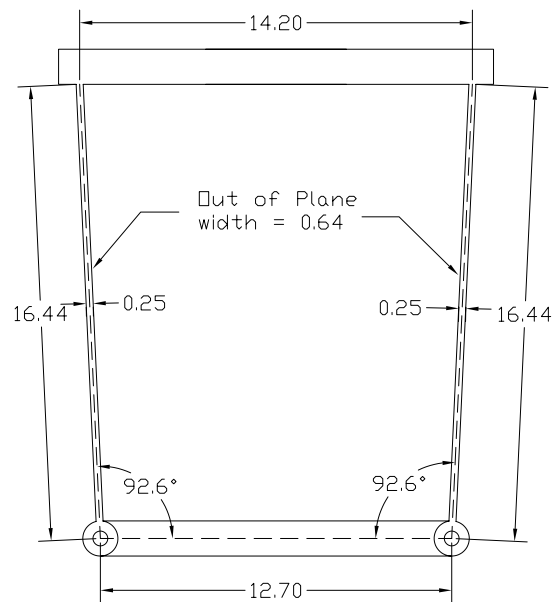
Dimensions (in cm) of the original tristable mechanism.
